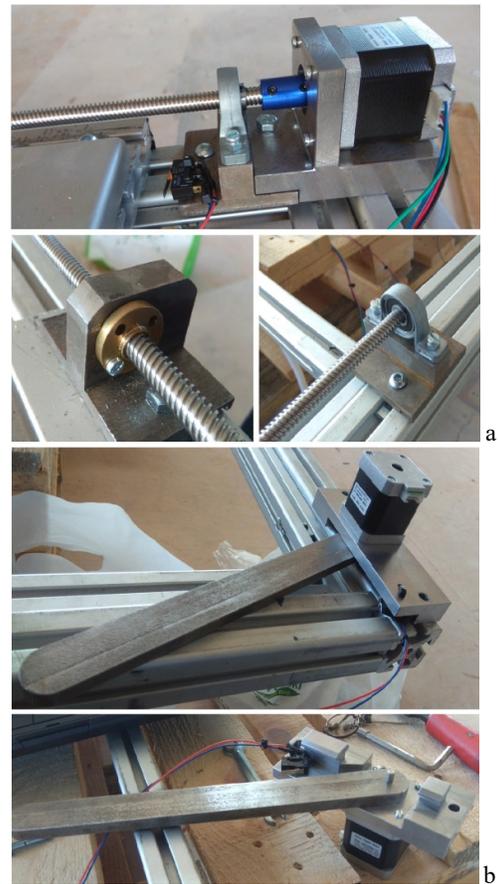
Assembled components: a – the left end of the bar; b – the rotating panel locator.
